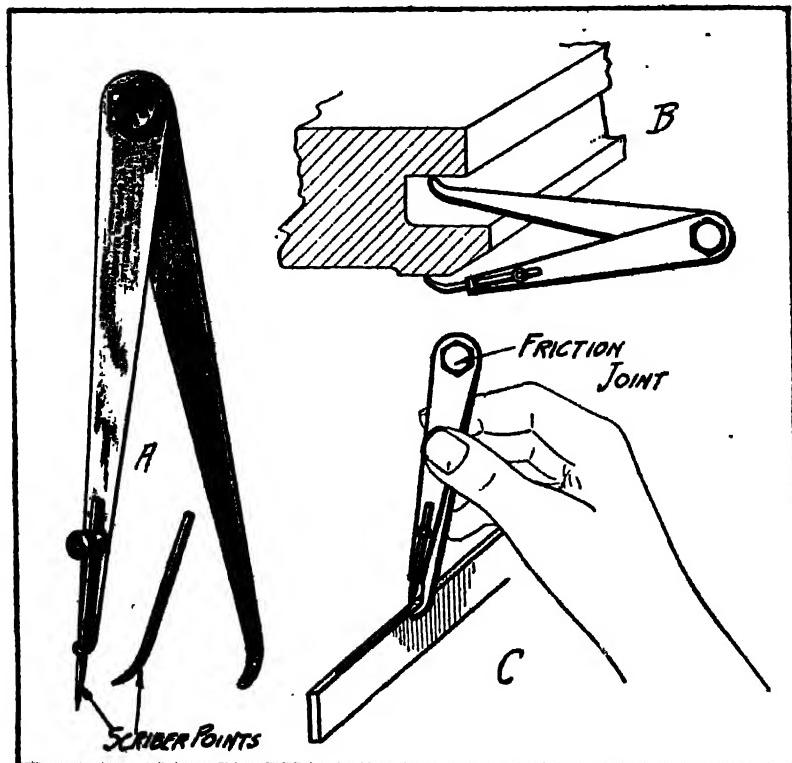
View Showing Utility of Combination Inside and Outside Friction Joint Calipers.
